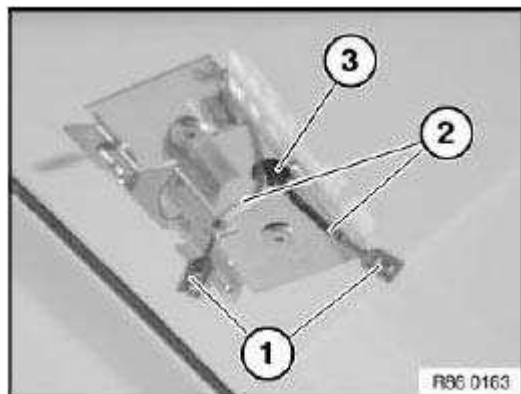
Identifying Opening, Flat Connectors & Cable Ends
